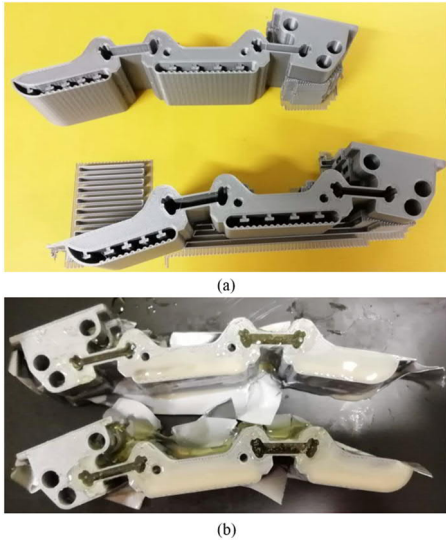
Fabrication of the gripper fingers. (a) 3D printed parts and (b) after pouring the resin.
